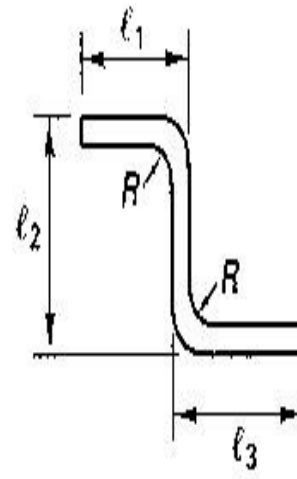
One method of determining the starting blank size (L) for several bending operations. Due to thinning, the product will lengthen during forming. ℓ_1 , ℓ_2 , and ℓ_3 are the desired product dimensions. See table to determine D based on size of radius R where t = stock thickness.
